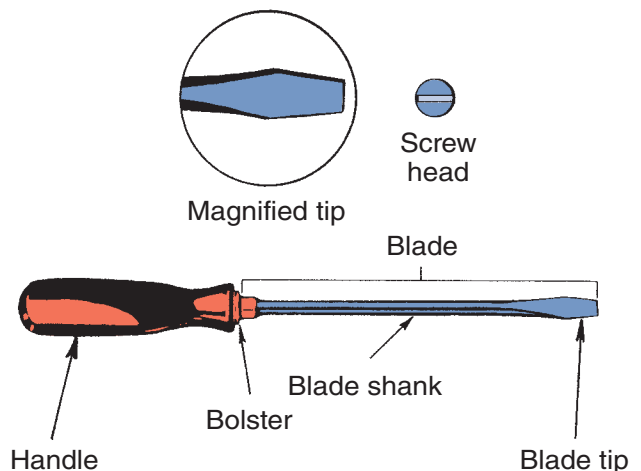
The blade tip screwdriver is used with slotted head fasteners.
